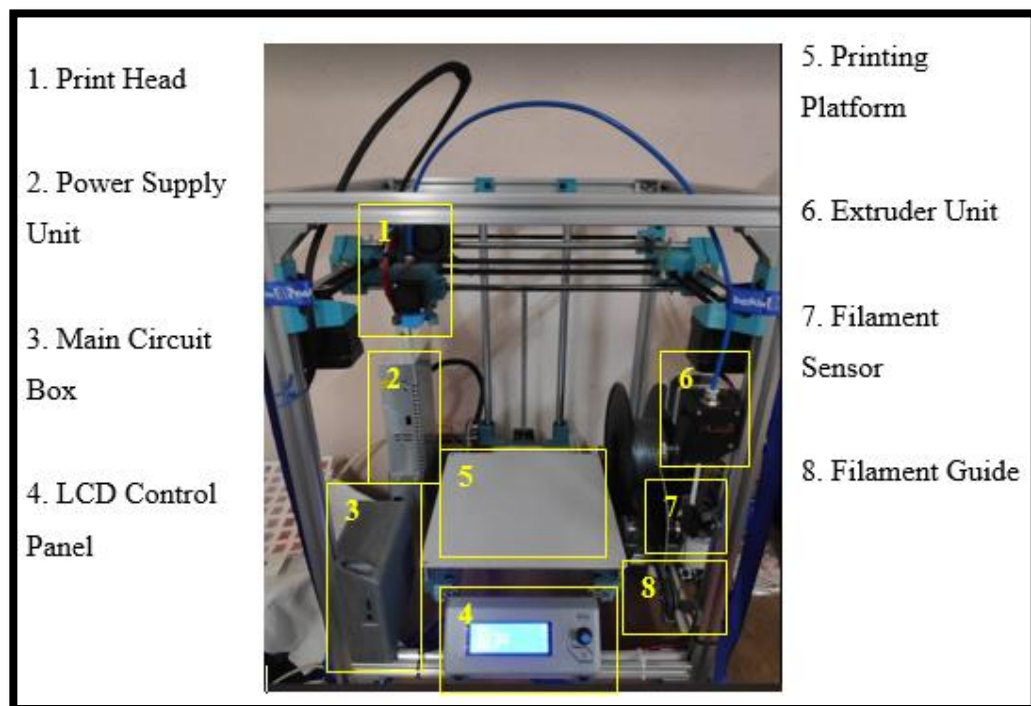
CoreXY 3D Printer Prototype Developed.
